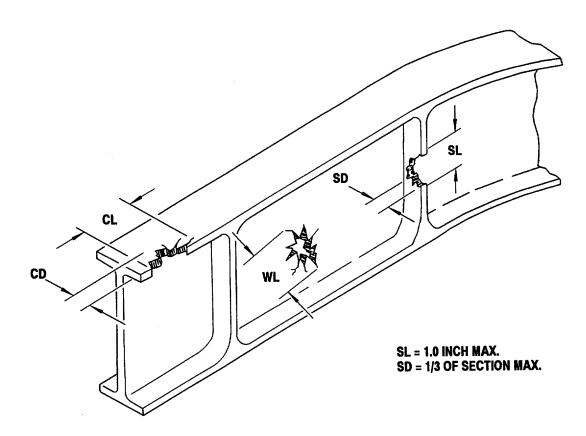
Evaluating Damage to Machined Frames and Beams
